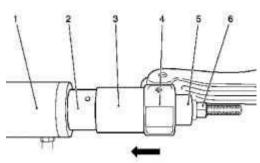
Extrusion rear damping sleeve: 1, 2, 3, 5, 6 - a special tool, 4 - damping bush
